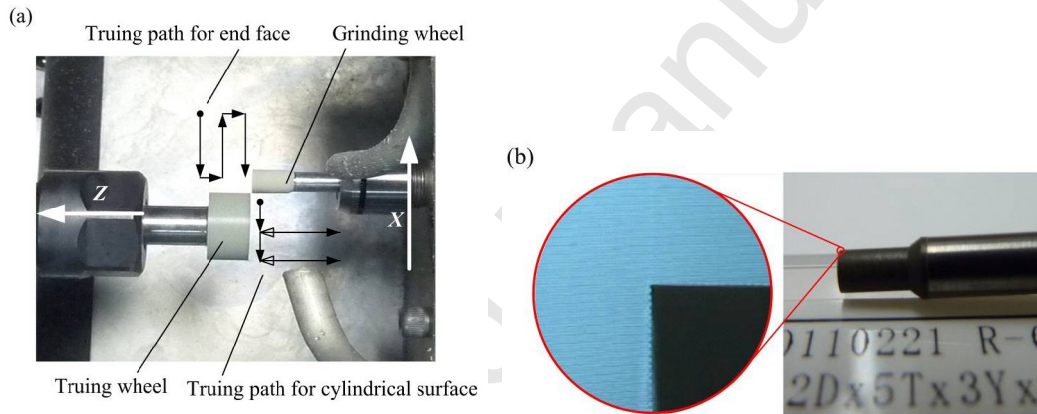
(a) Set-up for truing the cylindrical surface and end face of a resin bond diamond wheel and (b) the enlarged optical image of the wheel corner achieved.
